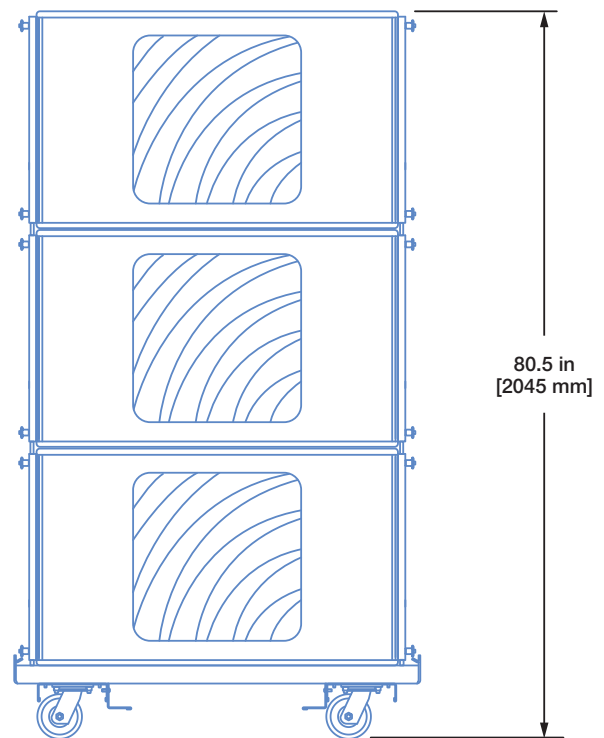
Dimensions of Three 2100-LFC Cabinets on MCF-2100 Caster Frame
